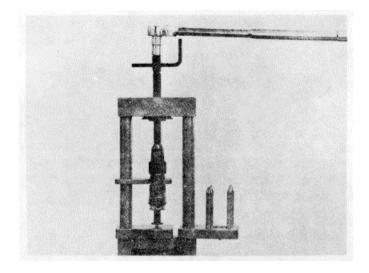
H-15. Torquing the Loading Fixture Stud of 3375084
